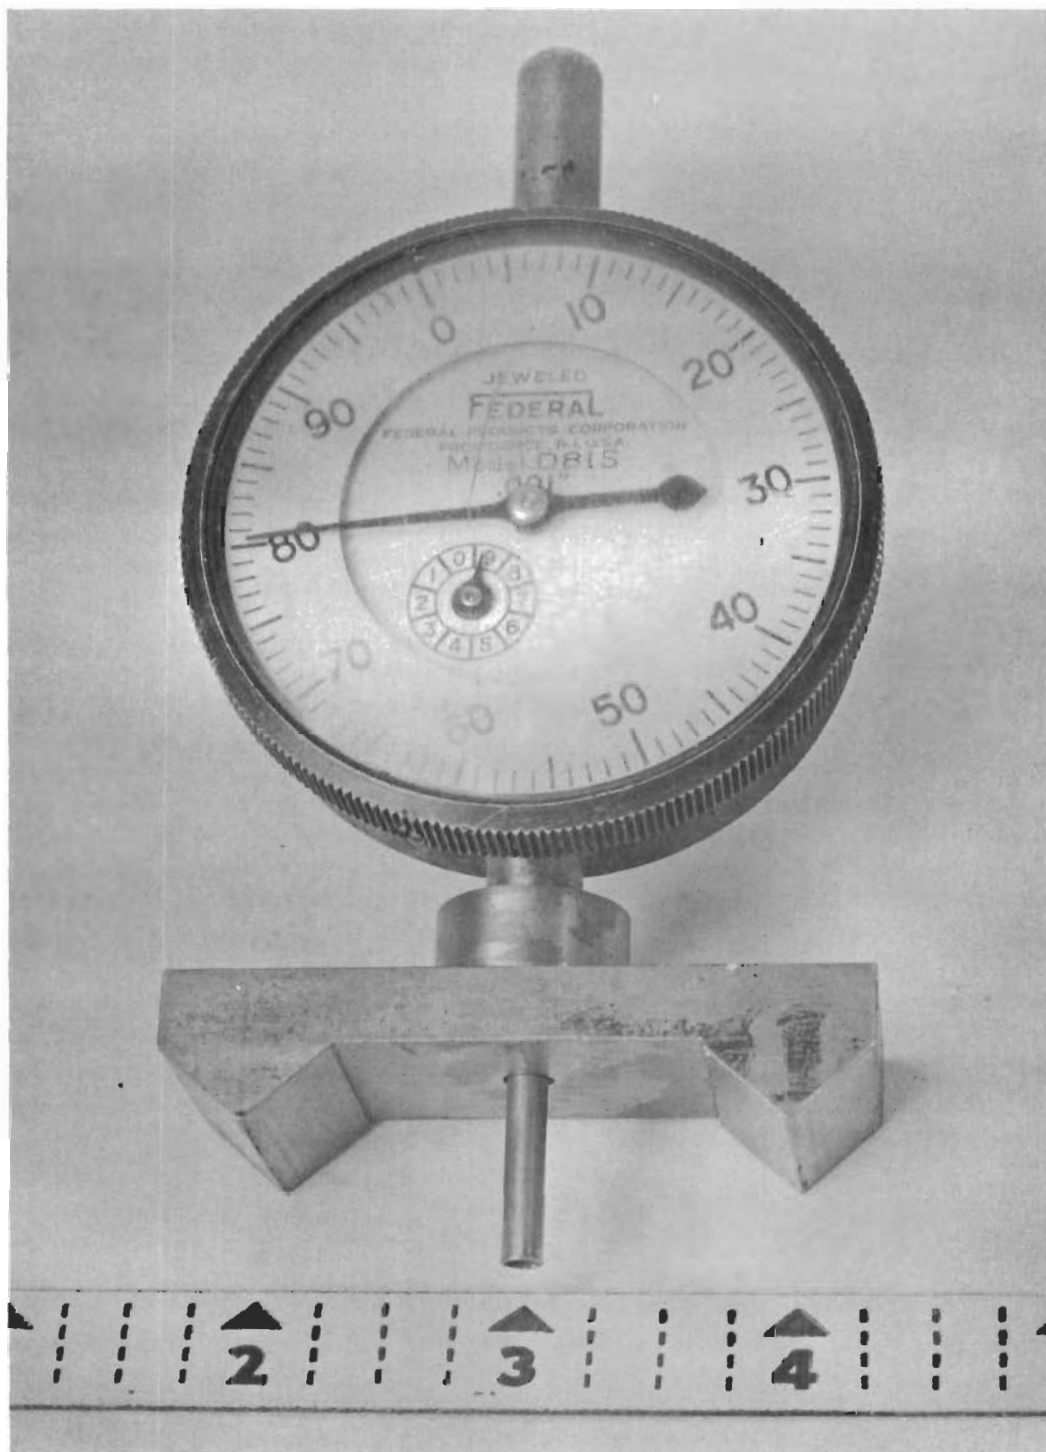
GAGE FOR MEASURING SPECIMEN ARC HEIGHT
